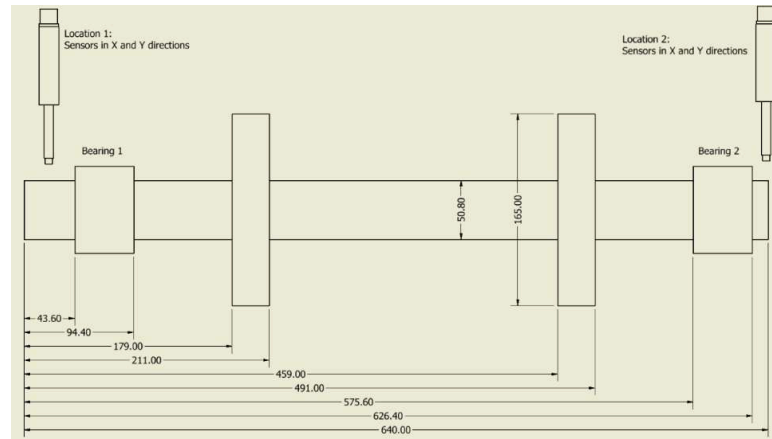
Rotor-Bearing System for Config. 3 (mm)
